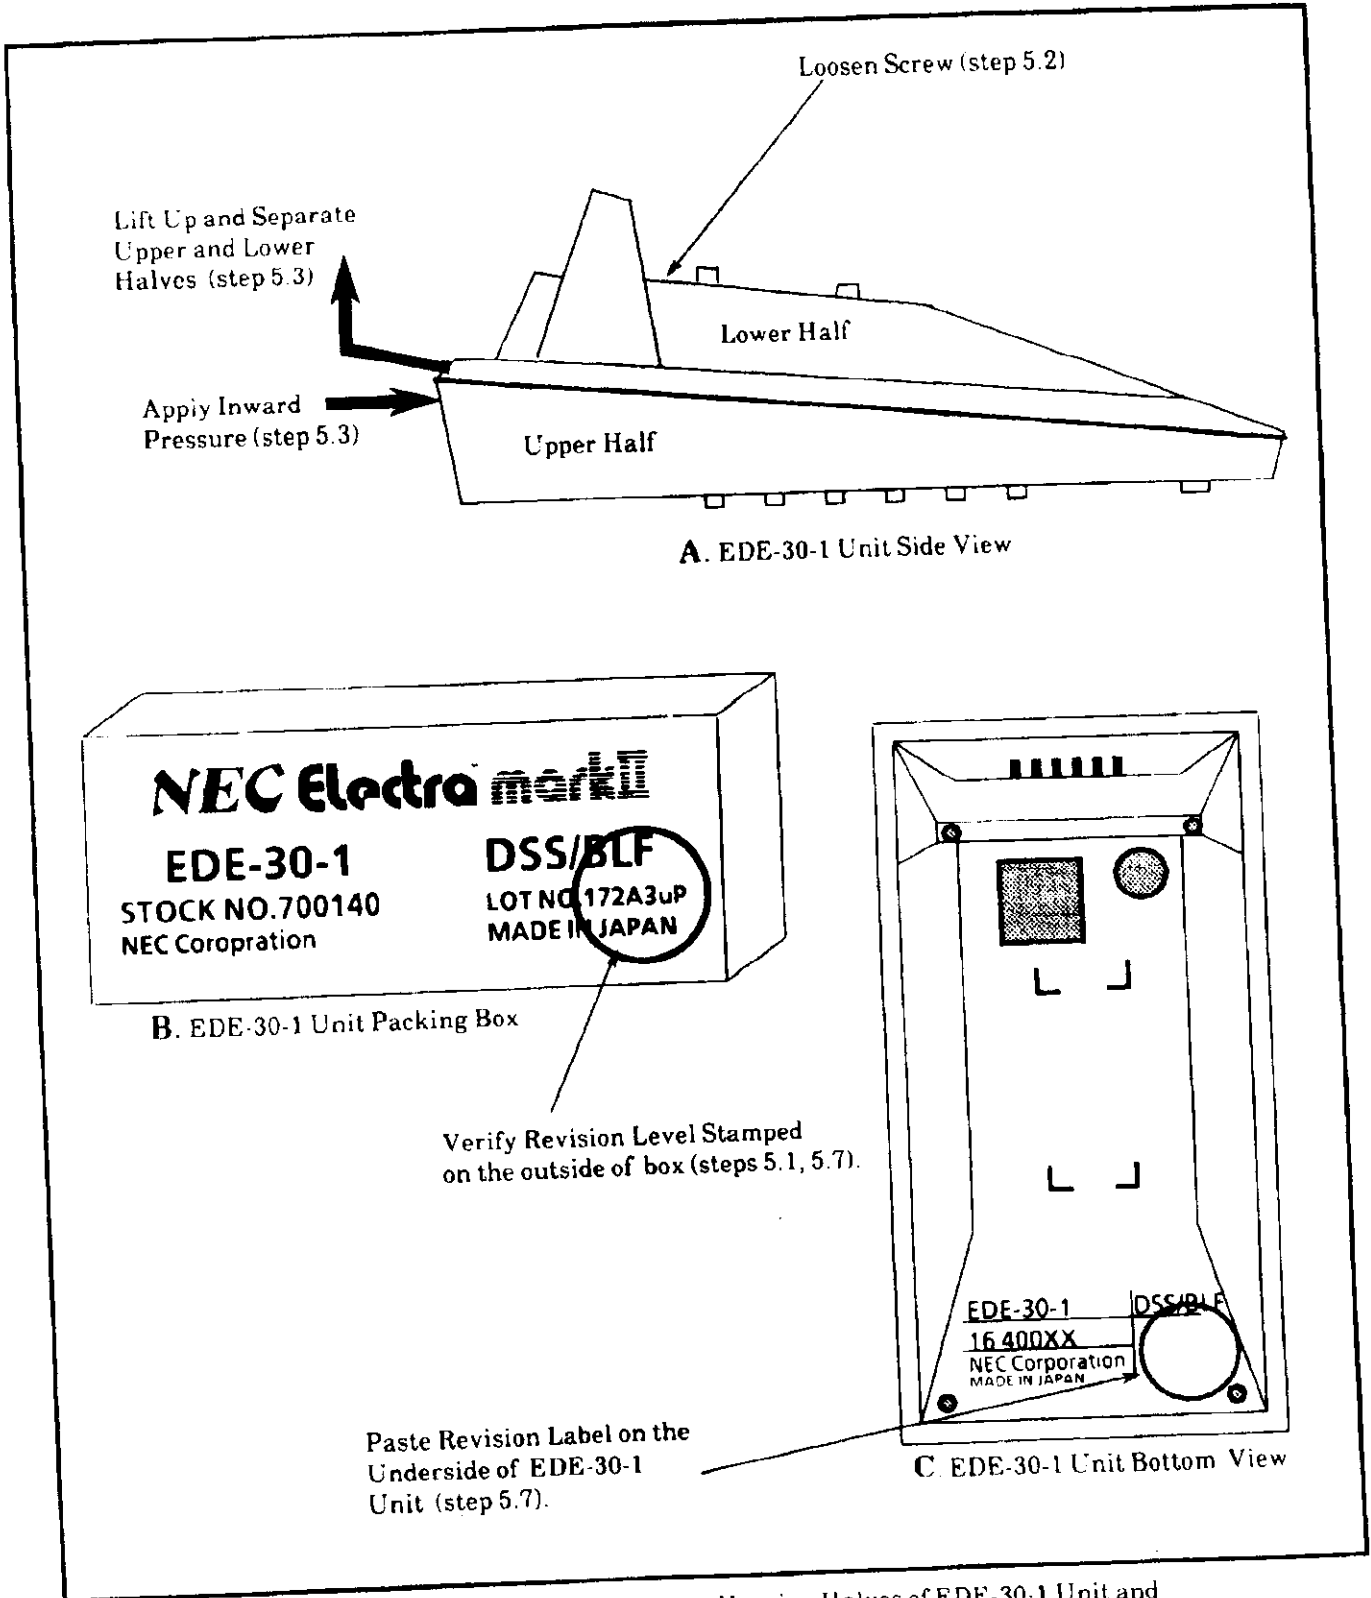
Separating Upper and Lower Housing Halves of EDE-30-1 Unit and Locating Revision Level Label
